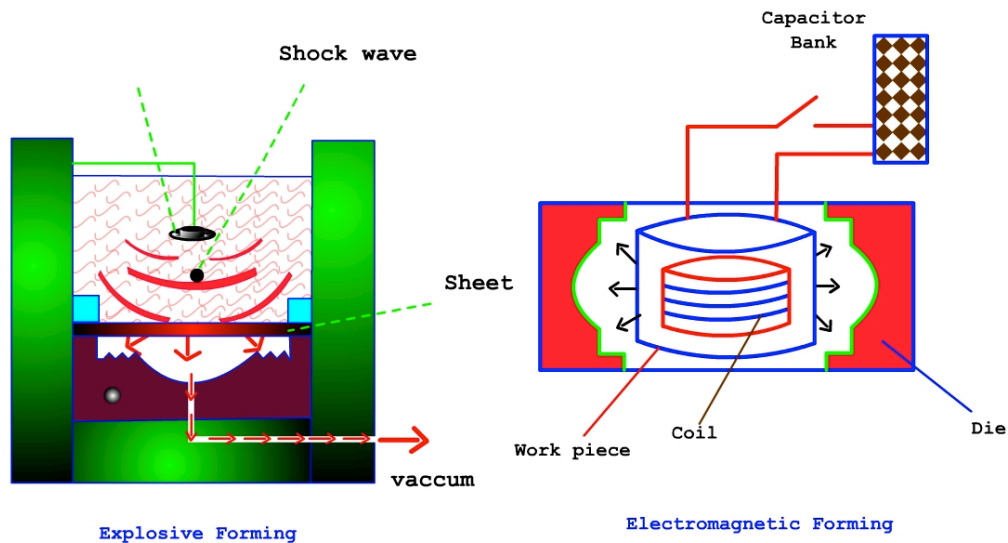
Explosive forming and electromagnetic forming
